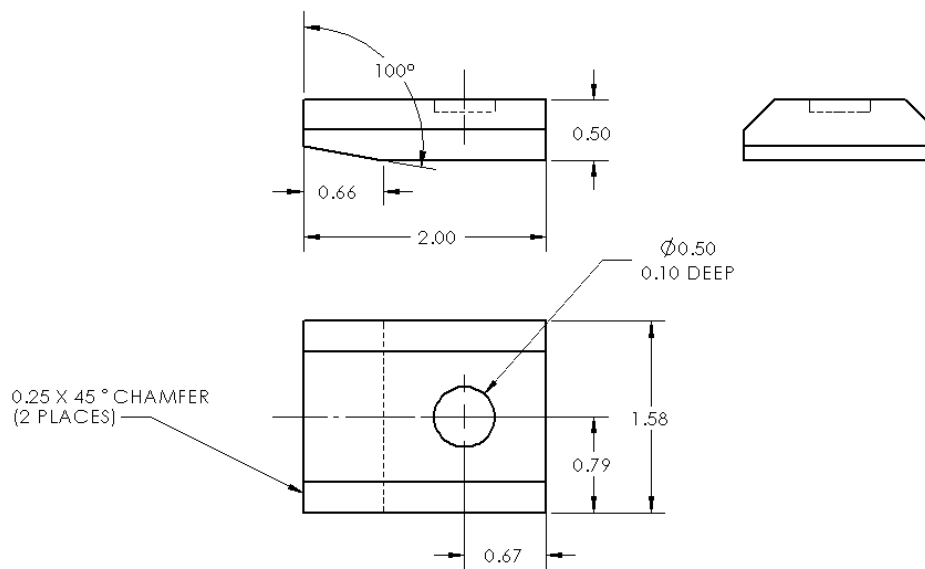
Edge loader for the Combined Loading Shear test fixture. All dimensions are in inches.
